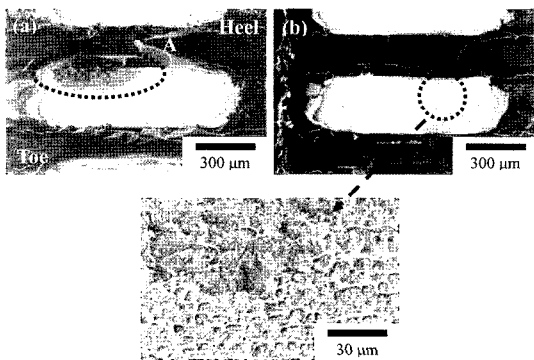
The fracture surface of solder joint (Sn plating on Cu LF). (a) After 500 cycles (b) After 1000 cycles (c) The magnified fracture surface after 1000 cycles.
